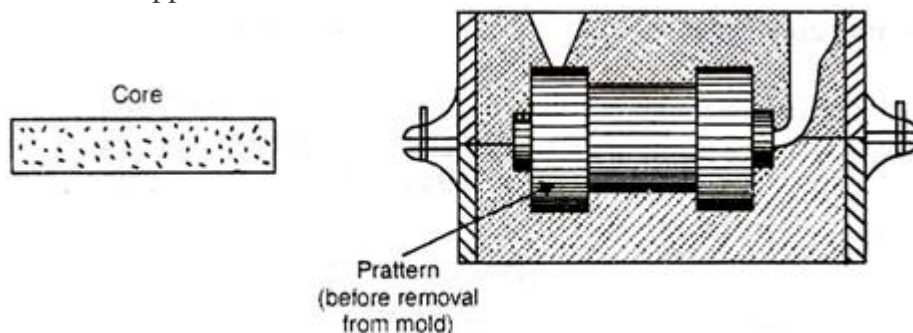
The pattern, mold, and core used for producing a short pipe.
